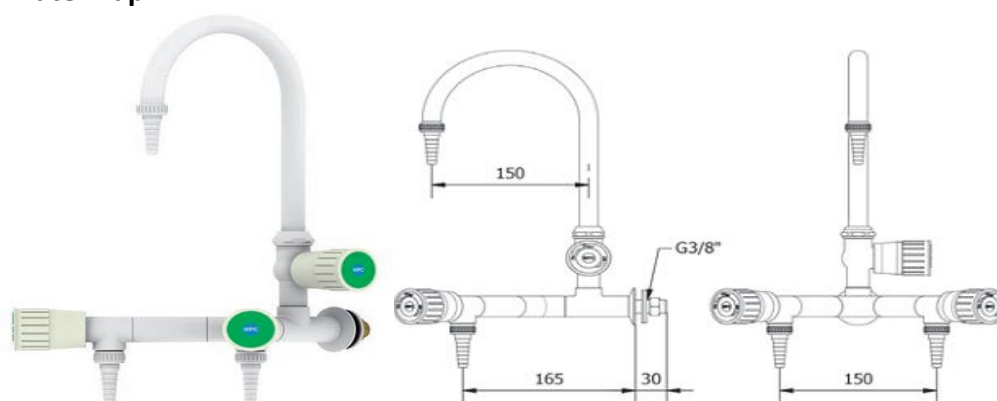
Three Way Wall Mounted Fittings with Swivelling GOOSENECK Spout
